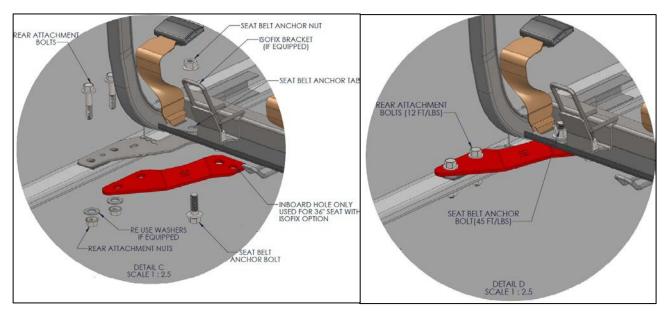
Bracket Installation – Thin Back – 26 Inch, 36 Inch, 38 Inch, and 39 Inch Seats (Driver's Side Shown)
